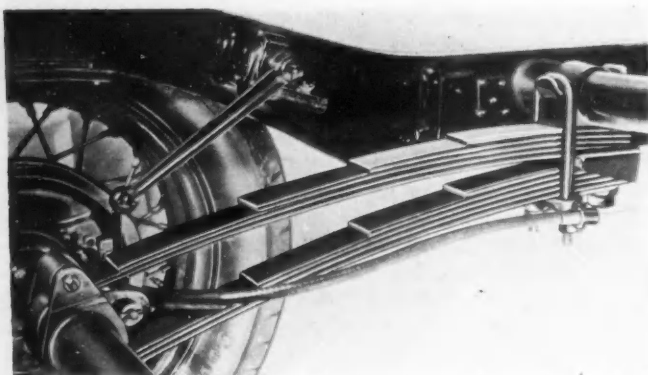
CONTINENTAL-FOUR WITH DOUBLE CANTILEVER REAR SPRINGS
